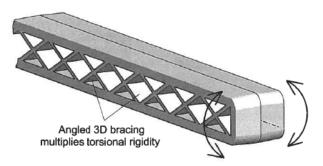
Three-dimensional bracing of open section for torsional rigidity. This is especially useful in cast and molded parts.
